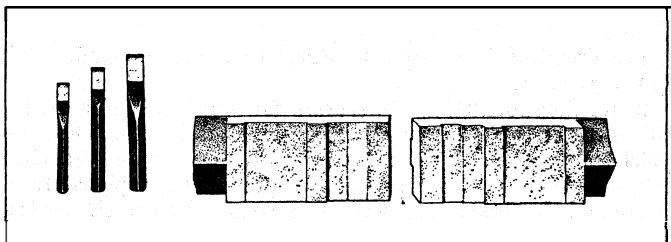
TRIP HAMMER DIES FOR FORGING COLD CHISELS. SHOWING THREE SIZES OF CHISELS PRODUCED IN SUCH DIES
